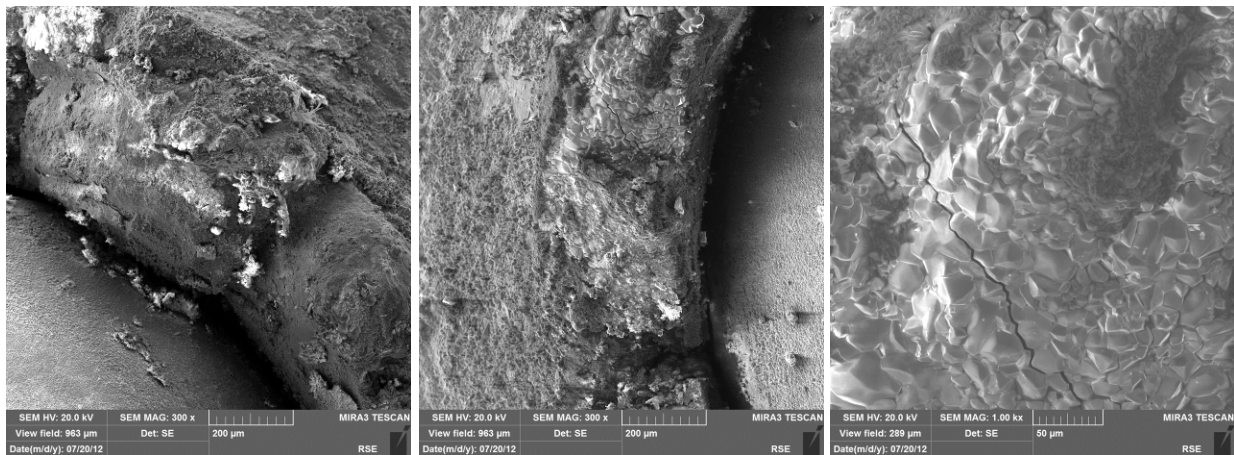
Details observed on SEM of fracture surface for specimen R266-4
